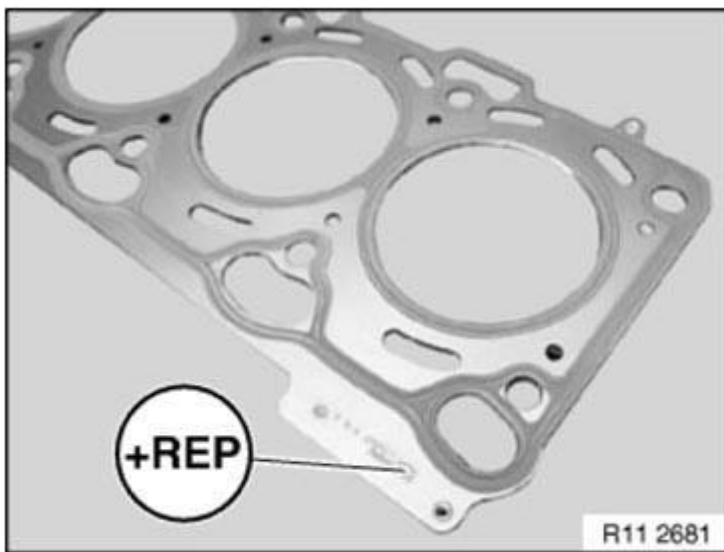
Identifying Cylinder Head Gasket (+REP)
